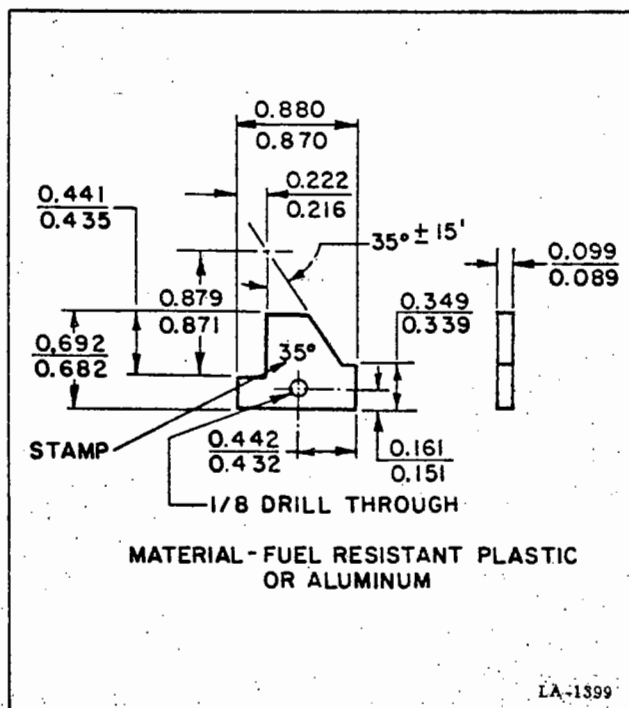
Dimensions for Manufacturing the T25939 Gage
